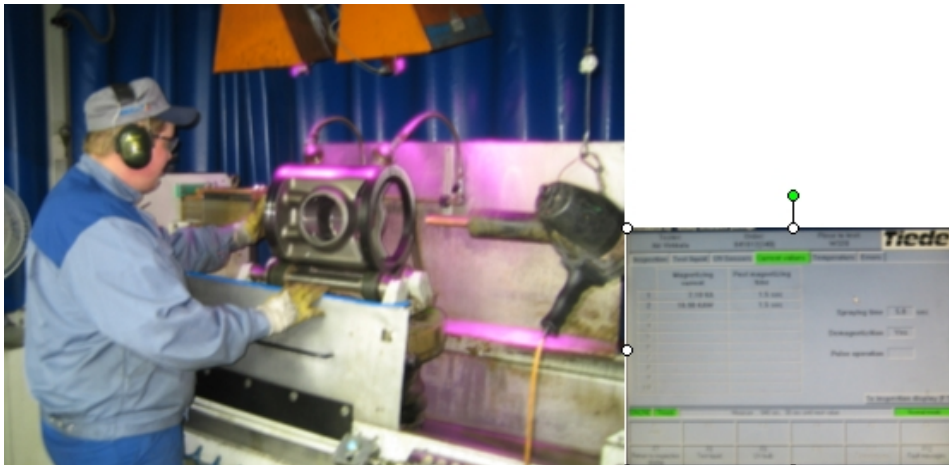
Magnetic particle inspection of piston skirt.
